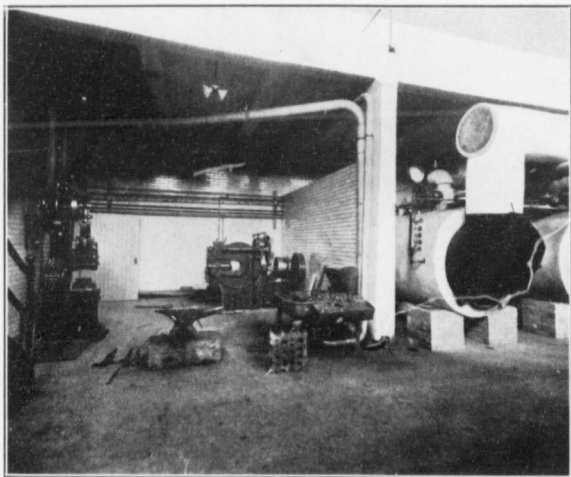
Boiler House and Smith's Shop, showing two marine type high pressure boilers, power hammer, shearing machine, and "Buffalo" down draught forge.
